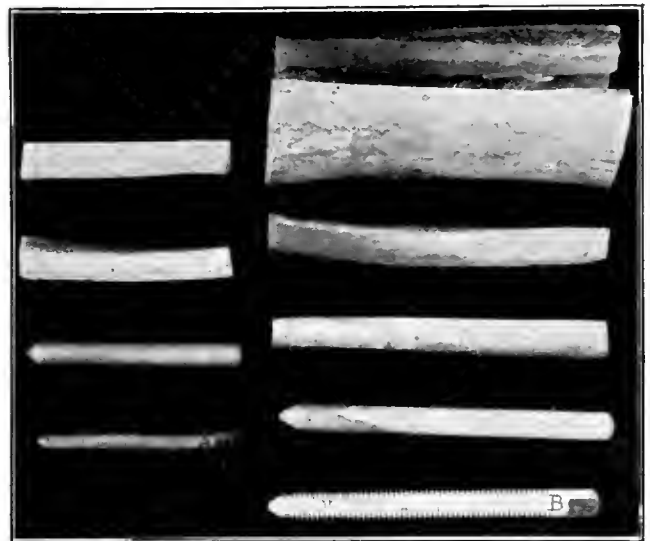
Piece of beef-bone with strips, blanks and screws: A, medium sized screw, 10 by 24; B, large sized screw, $\frac{5}{16}$ by 18.
